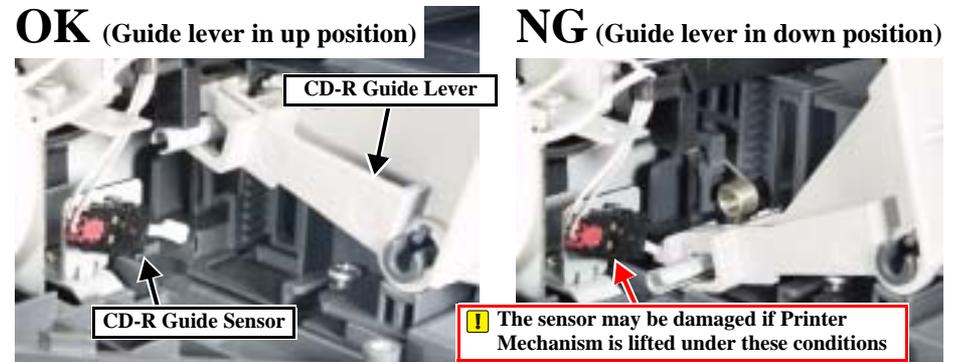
CD-R Guide Lever and CD-R Guide Sensor
